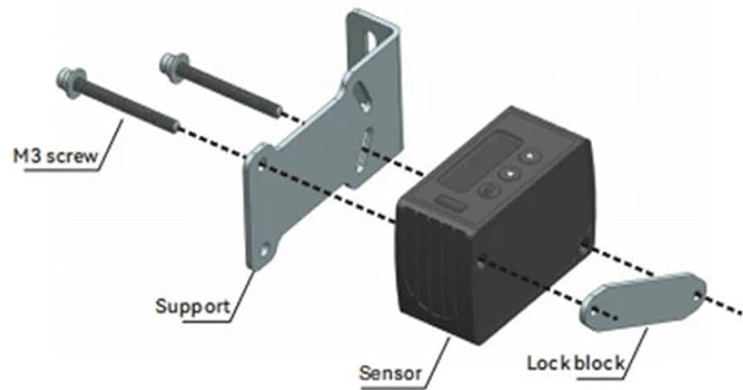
Exploded view of the sensor assembly, illustrating how the sensor, support bracket, lock block, and M3 screws fit together for mounting.
